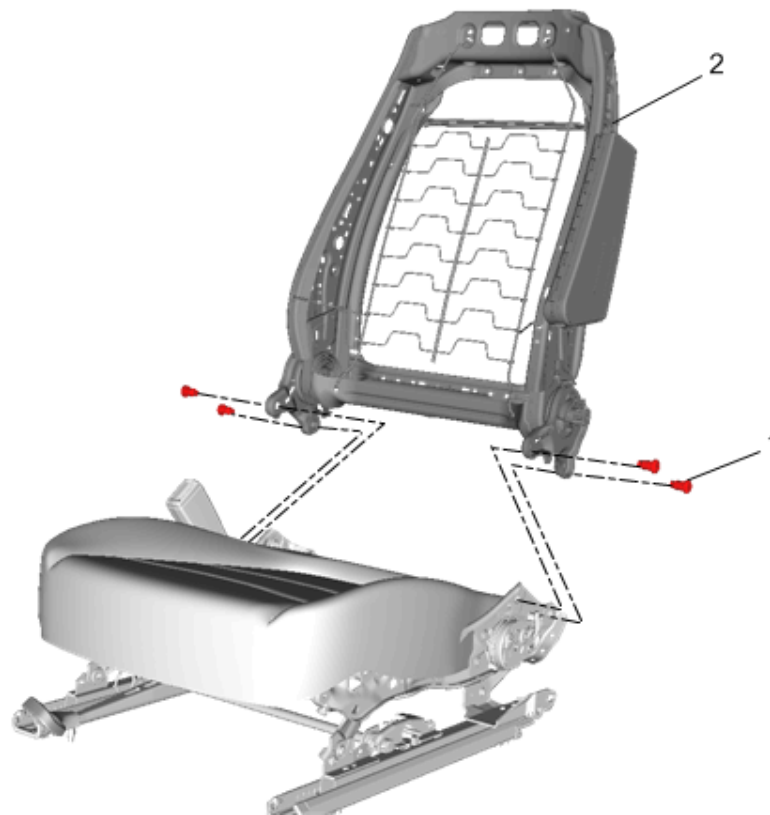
Driver or Passenger Seat Back Cushion Frame
